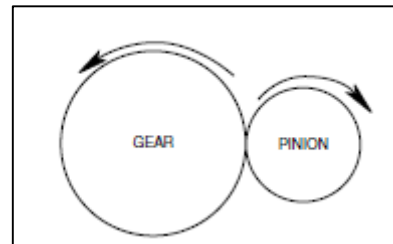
Diagram indicates Rotation of Gear and Pinion.
